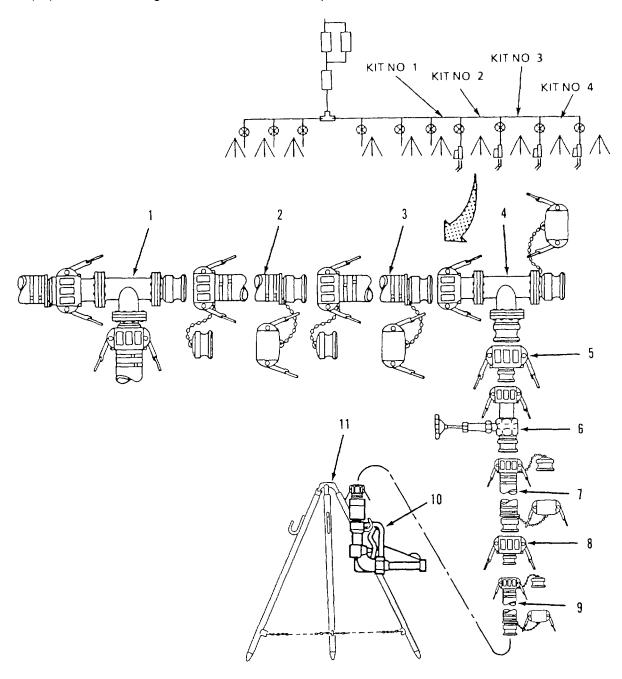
Hose Nozzle Connection Kit Disassembly
